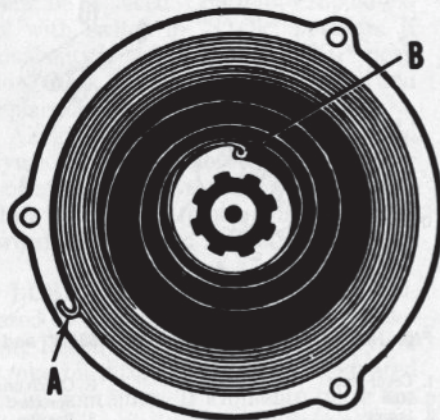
View of rewind spring installation in starter cover. Hook outer loop (A) of spring in notch as shown. Inner loop (B) of spring must be curved inward to engage notch of spring lock.
